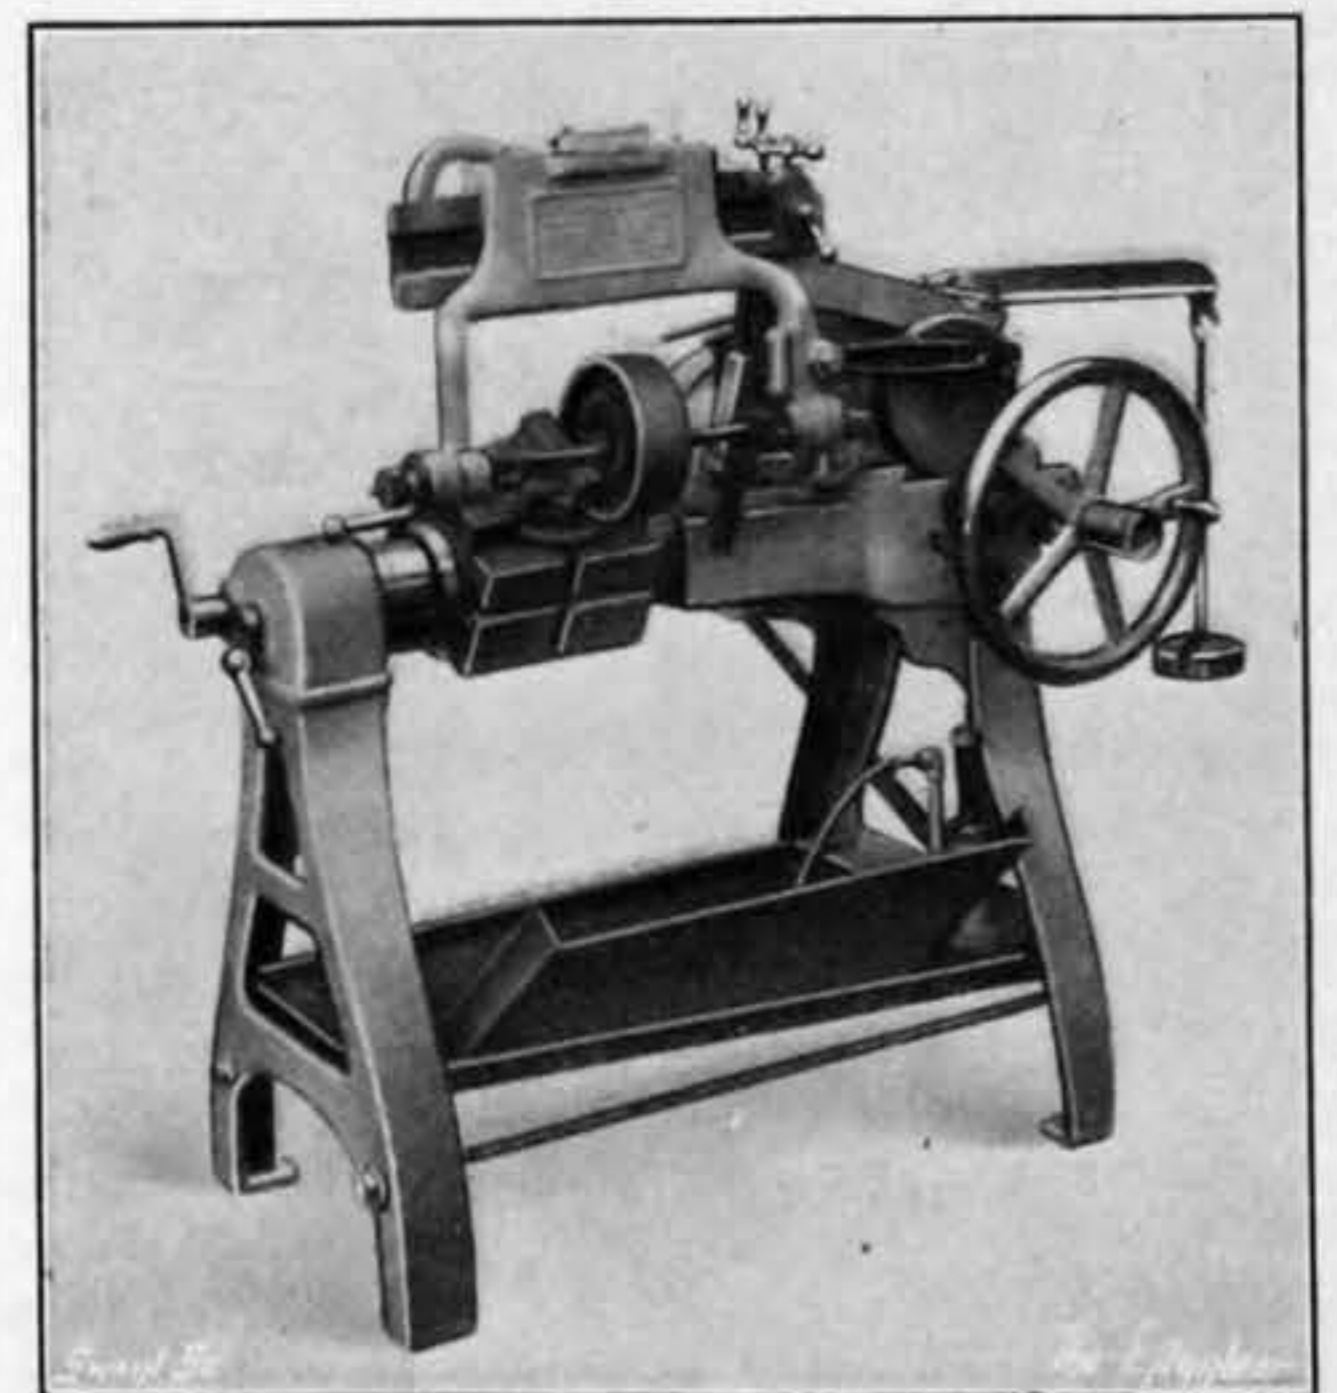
SAWING, FILING, ETC., MACHINE—MULTIPURPOSE
